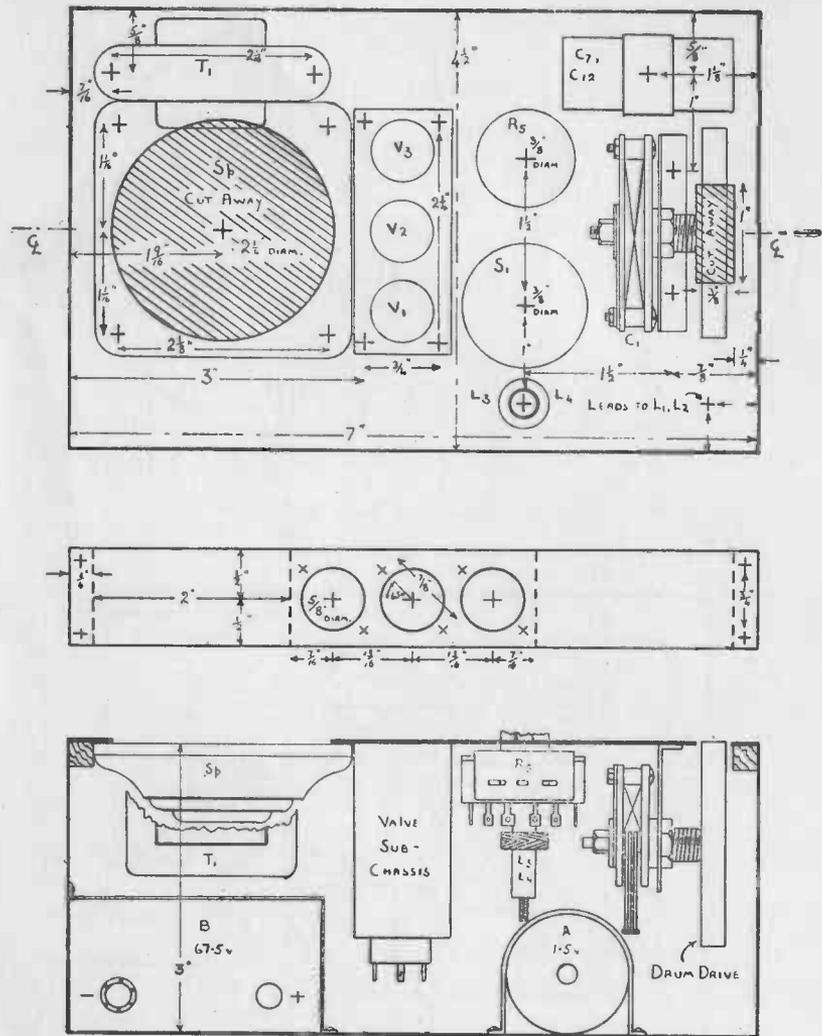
Panel Dimensions, Sub-chassis and Side Constructional View of the "Minor"
